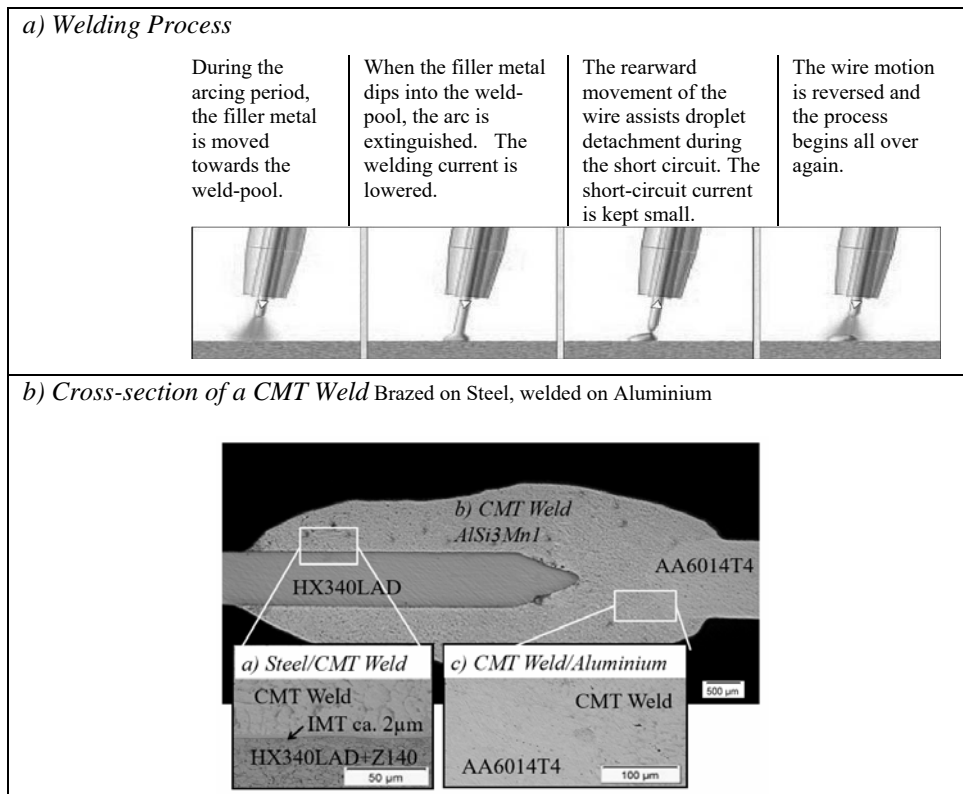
Schematic CMT Welding. a)Welding Procedure; b) cross section.
